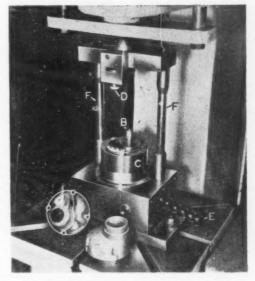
At this Set-up, on a Hi-Ton Hydraulic Press, a Porous Bronze Bush is Inserted, and Sized with a Hard Chromium-plated Pin
